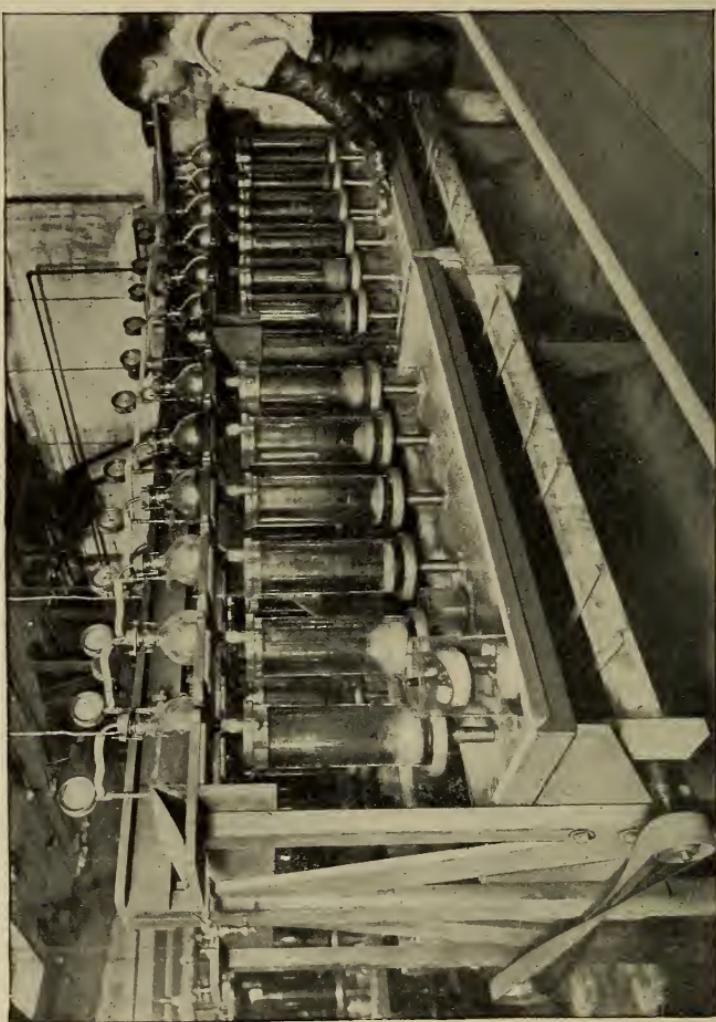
Squirting Filaments (Westinghouse Lamp Works).
